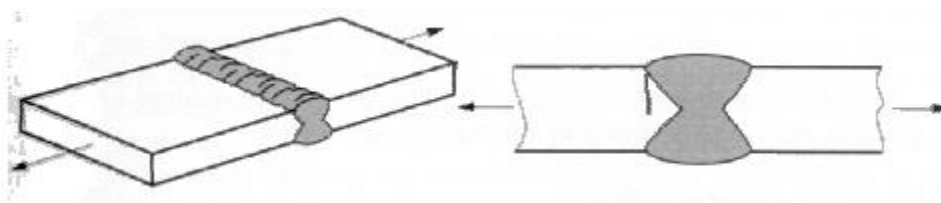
Fatigue cracking of a transverse butt weld (Blondeau R., 2008)
